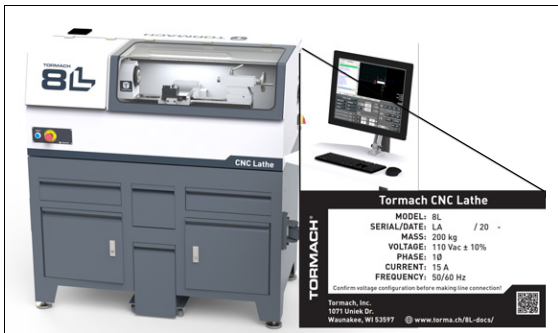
Example of the serial number plate on the side of the electrical cabinet.
